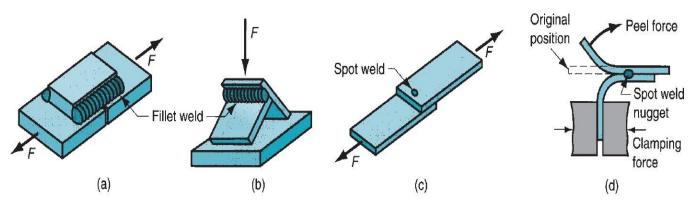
Mechanical tests used in welding: (a) tension-shear test of arc weldment, (b) fillet break test, (c) tension-shear test of spot weld, (d) peel test for spot weld.
